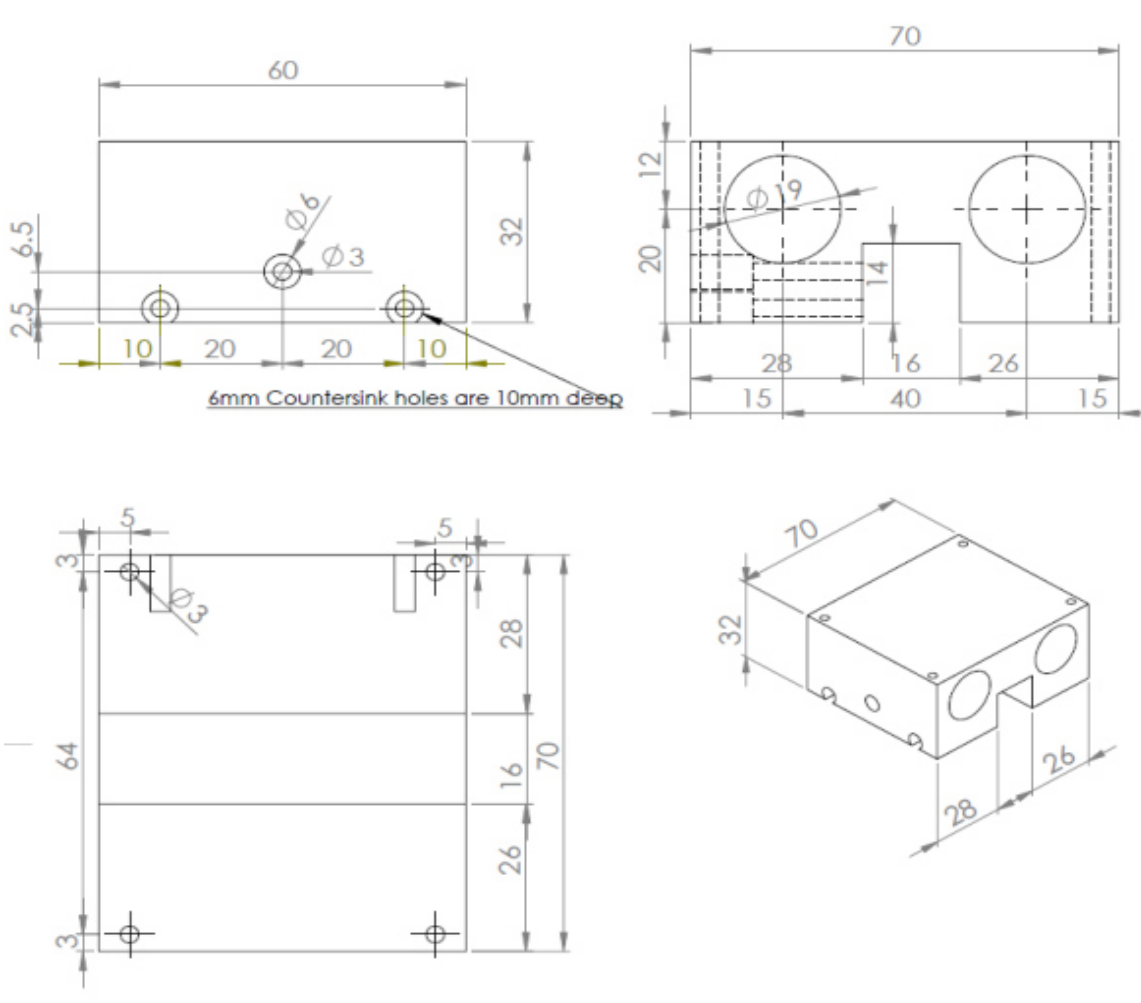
'LaserBase v1'. This is the toolhead mounting platform.
